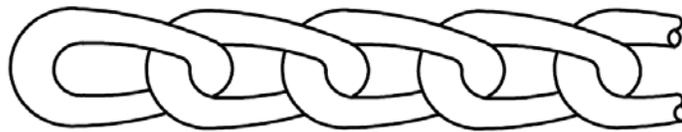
Type I, class 5, style 2, welded steel twist-link chain, short-link pattern (machine).
